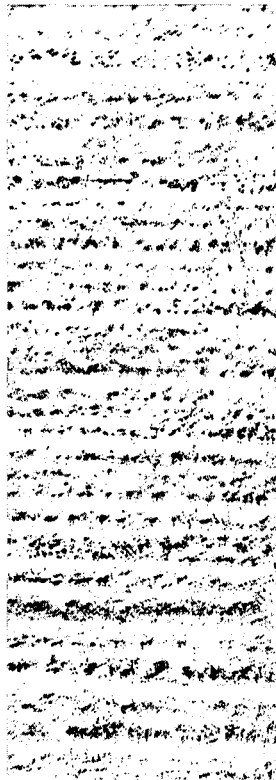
FIG. II.—Runs Nos. 6 and 7. Stone as left from Run No. 5 cut over with the three-to-the-inch straight-cut burr.
